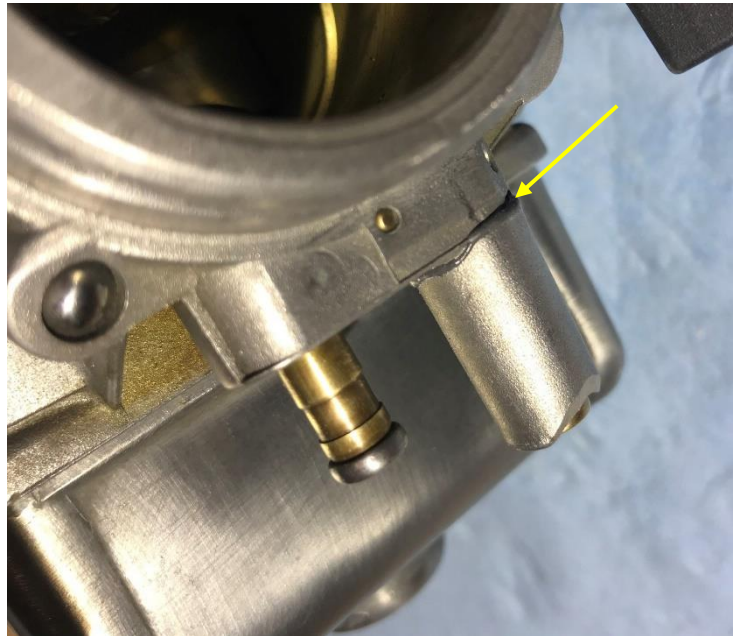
Fractured housing for the slow idle screw epoxied back into place.
